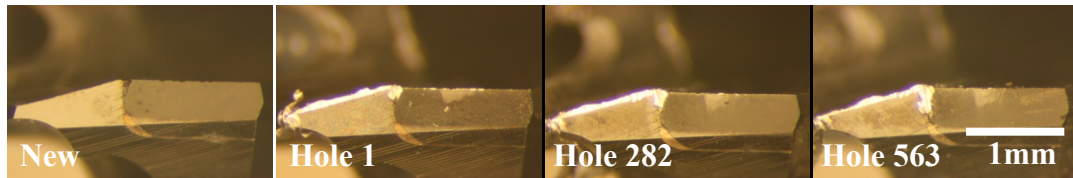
Tool wear micrographs of brazed PCD CTB010 drill under 3bar cutting fluid, 130m/min cutting speed (Test 5)
